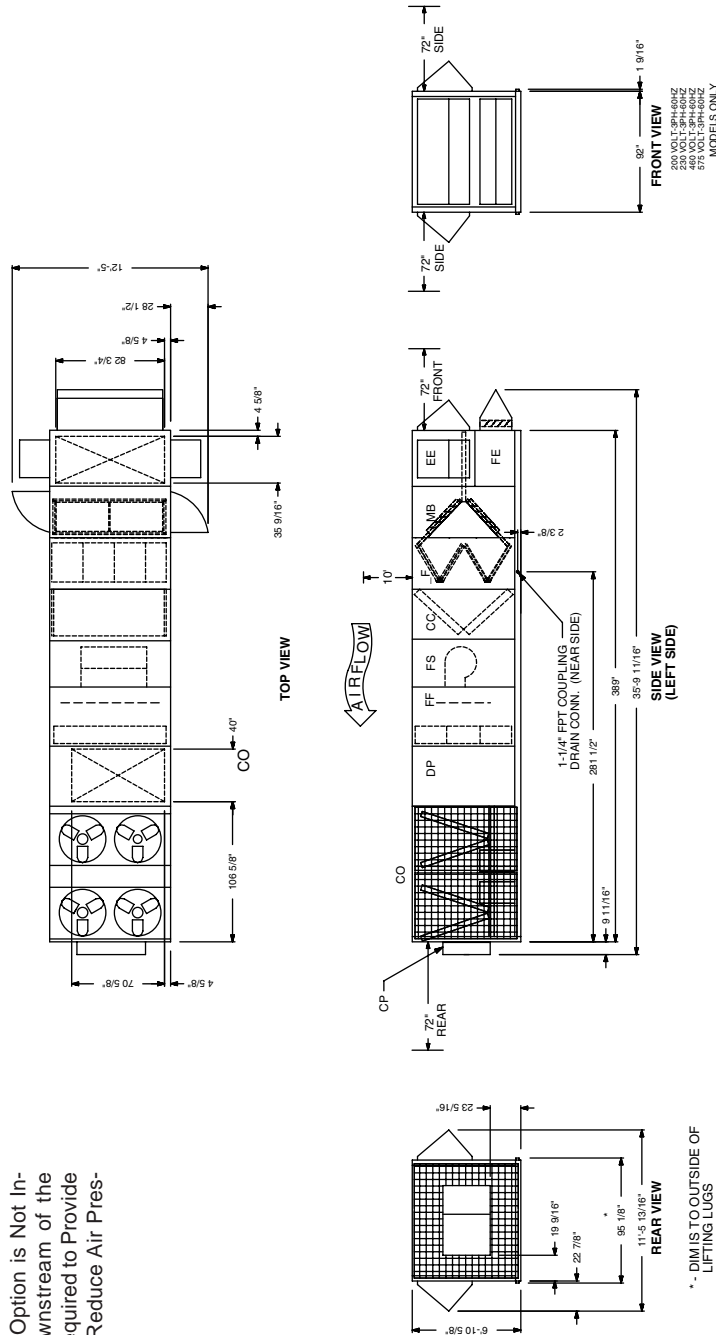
GENERAL ARRANGEMENT DRAWING
